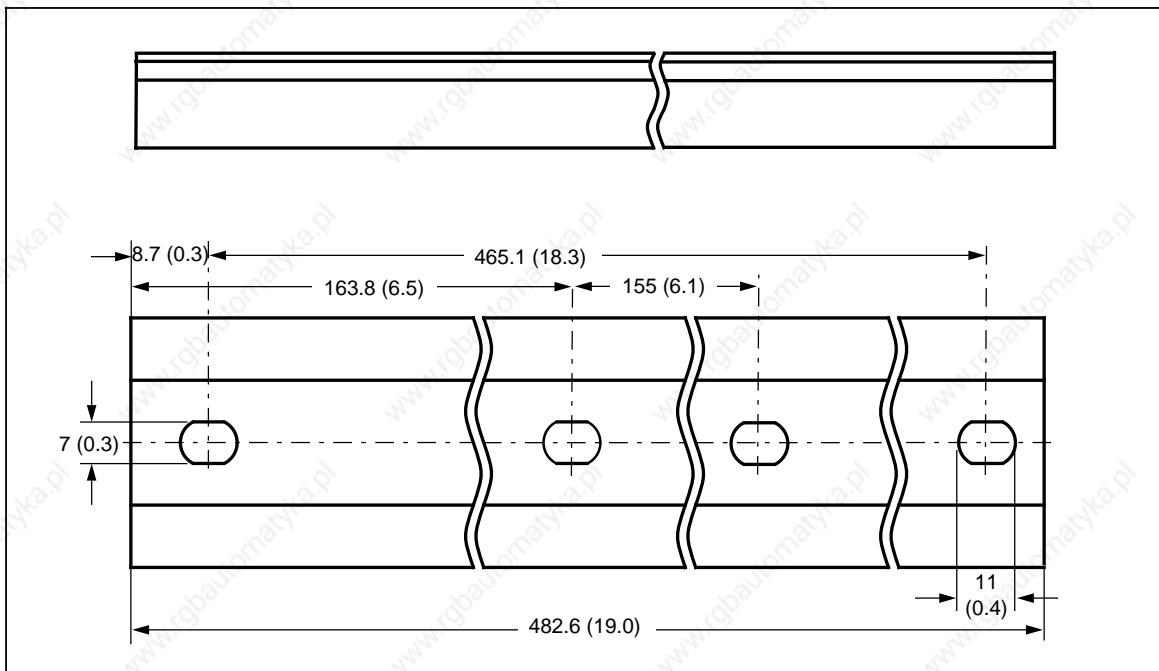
Dimension Drawing of the 483-mm (19-in.) Standard Mounting Rail
